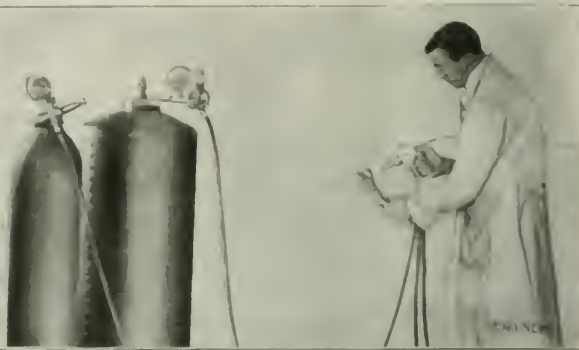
COATING AN IRON CASTING WITH COPPER WITH THE SCHOOP PISTOL
